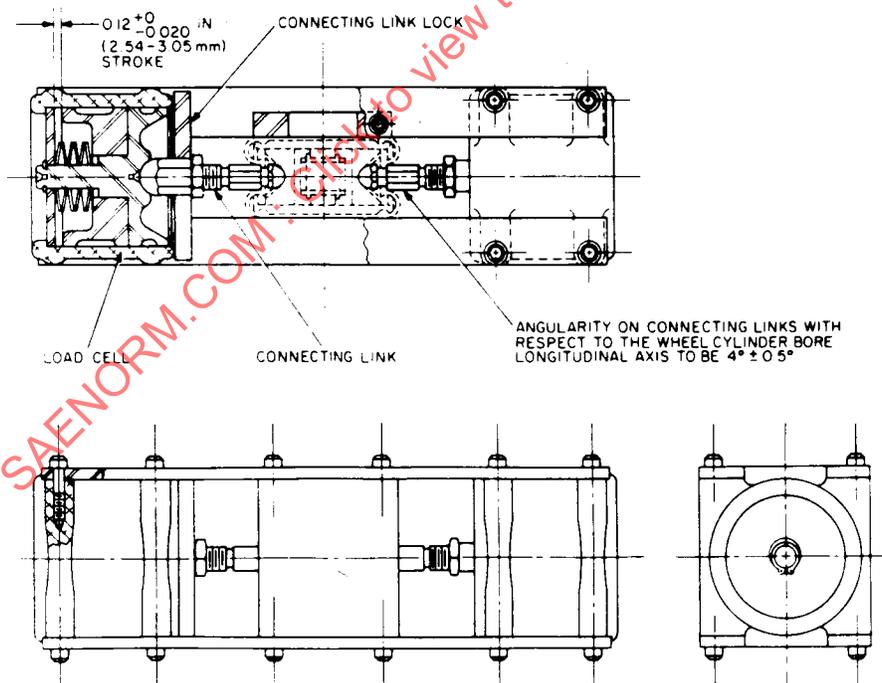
WHEEL CYLINDER LOAD FIXTURE
